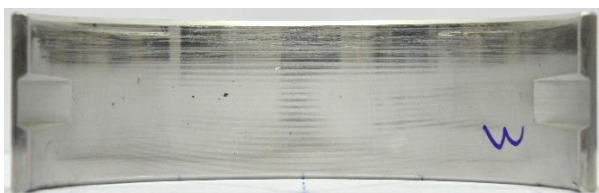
Unilateral edge loading of a main bearing lower shell in a high-speed diesel engine
